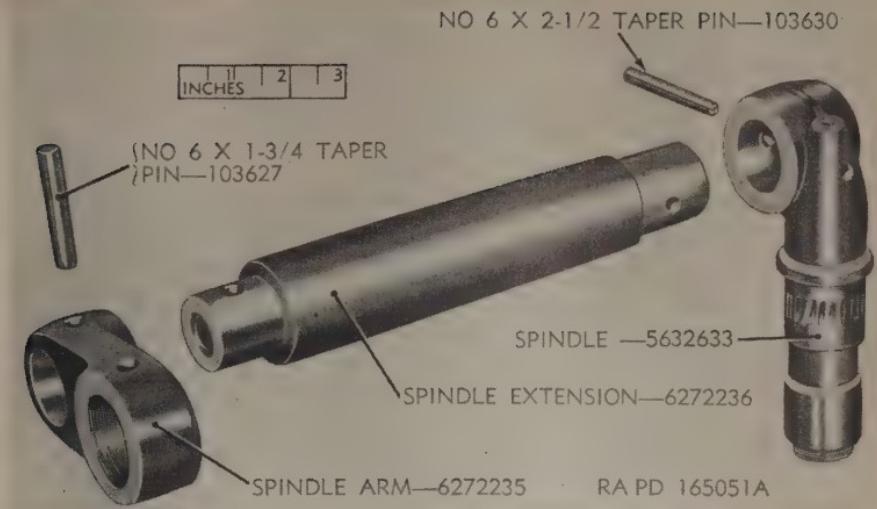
Telescope mount M54—spindle assembly—exploded view.
